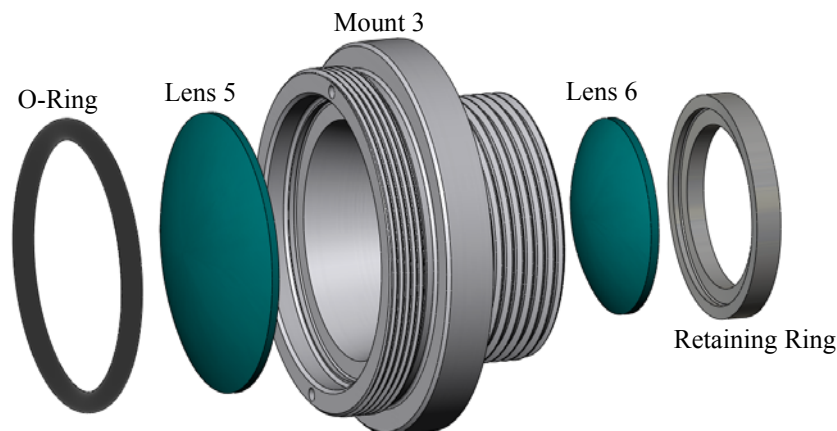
Exploded view of prototype 3.4 mount for lenses 5&6.
